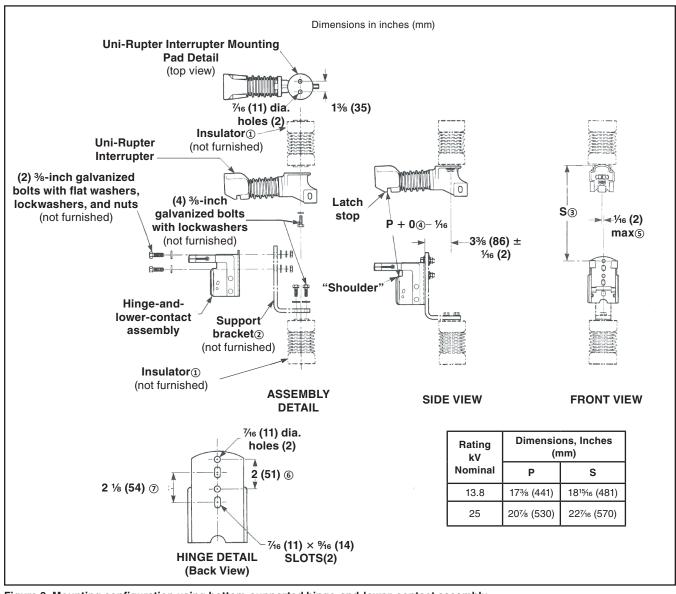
Mounting configuration using bottom-supported hinge-and-lower-contact assembly.
